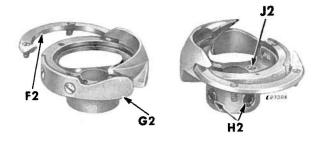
Sewing Hook Removed from Machine Showing Hook Washer
